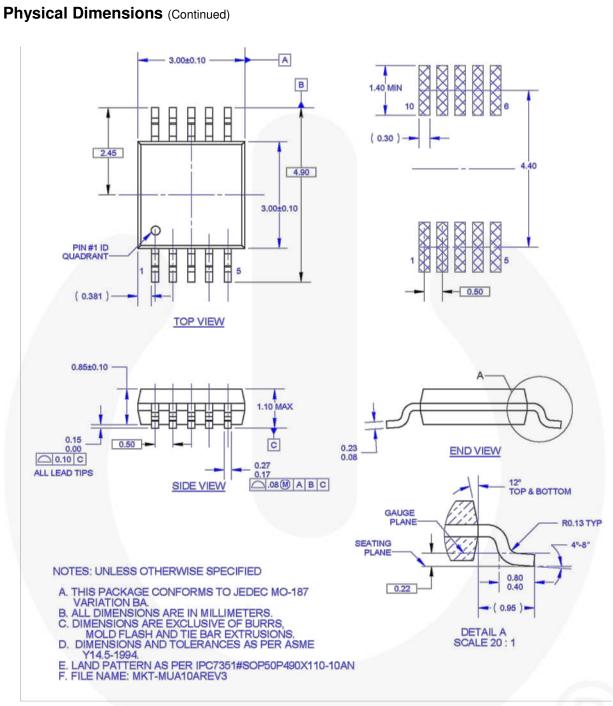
10-Lead, Molded Small Outline Package (MSOP)
